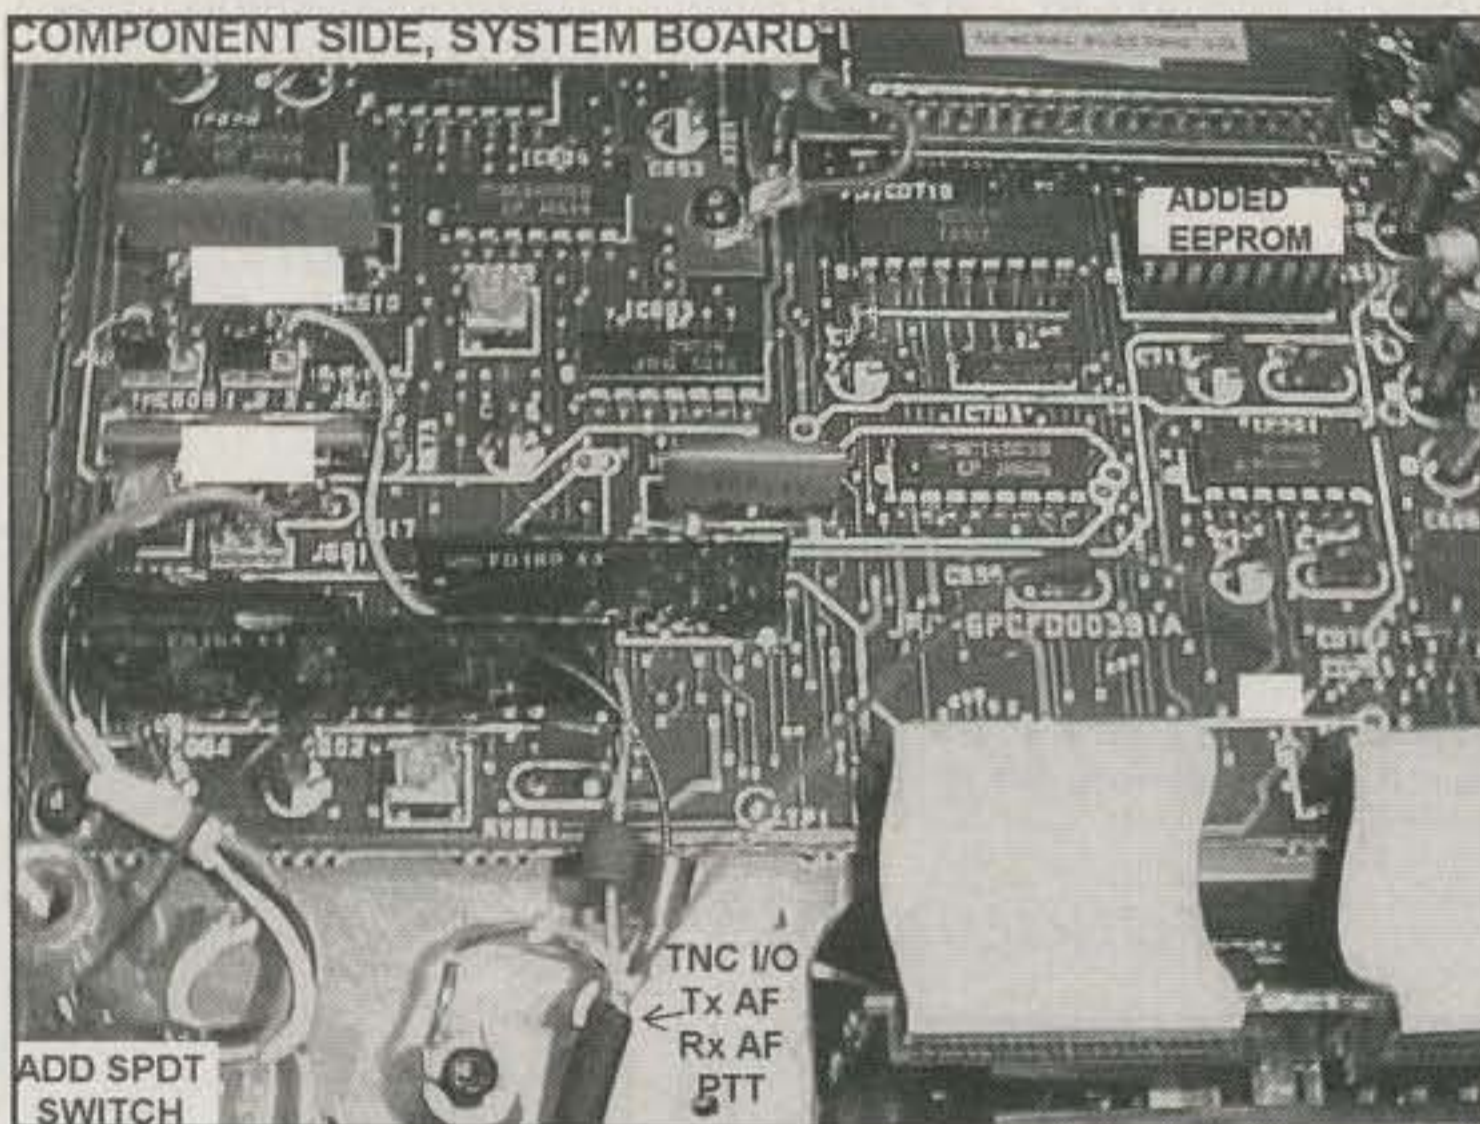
pins 2 and 3 are routed to the newly installed SPDT shown here. Pin 3 is attached to the switch center post/wiper, and pin 2 goes to one side of the switch.
